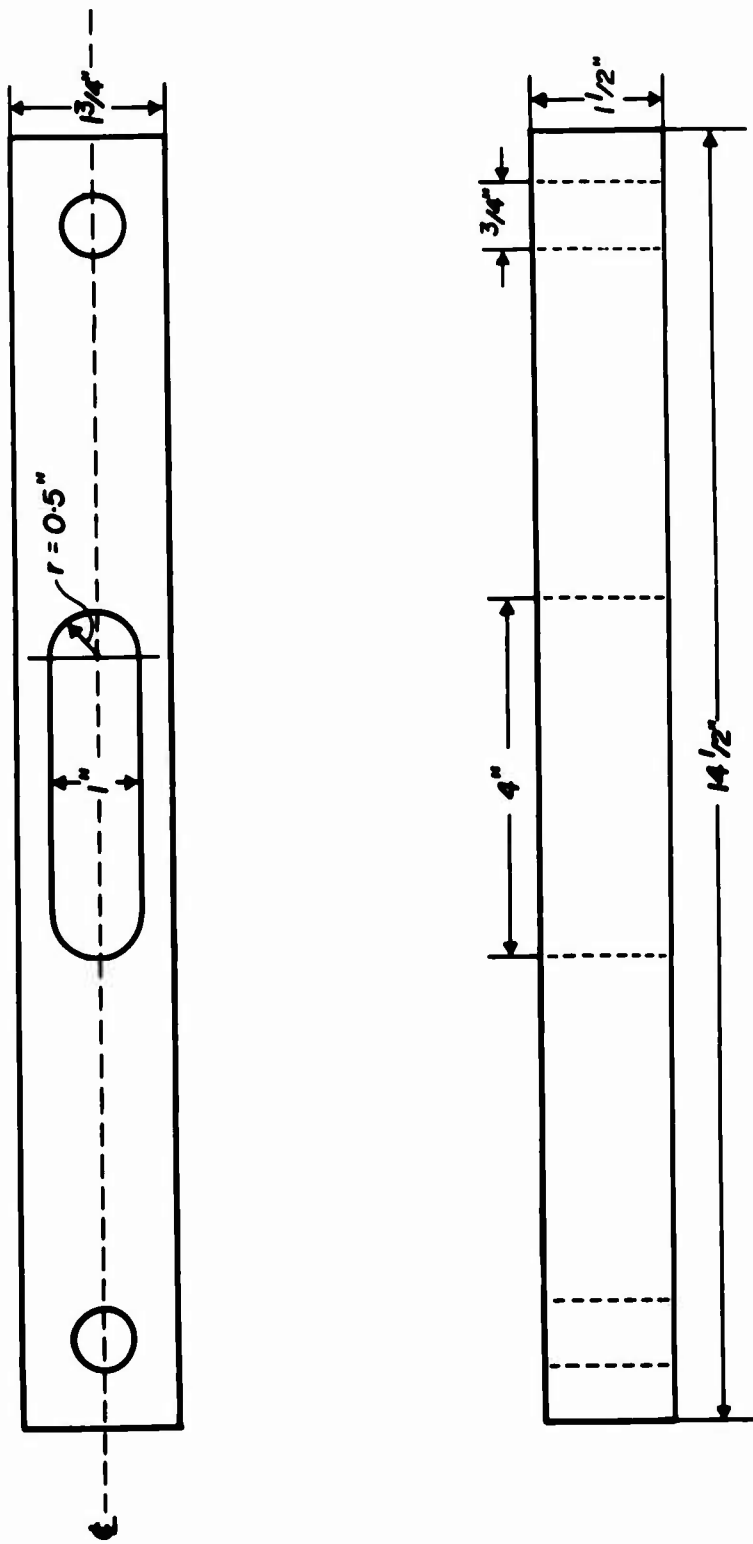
ASSEMBLY - HOLDING BARS
